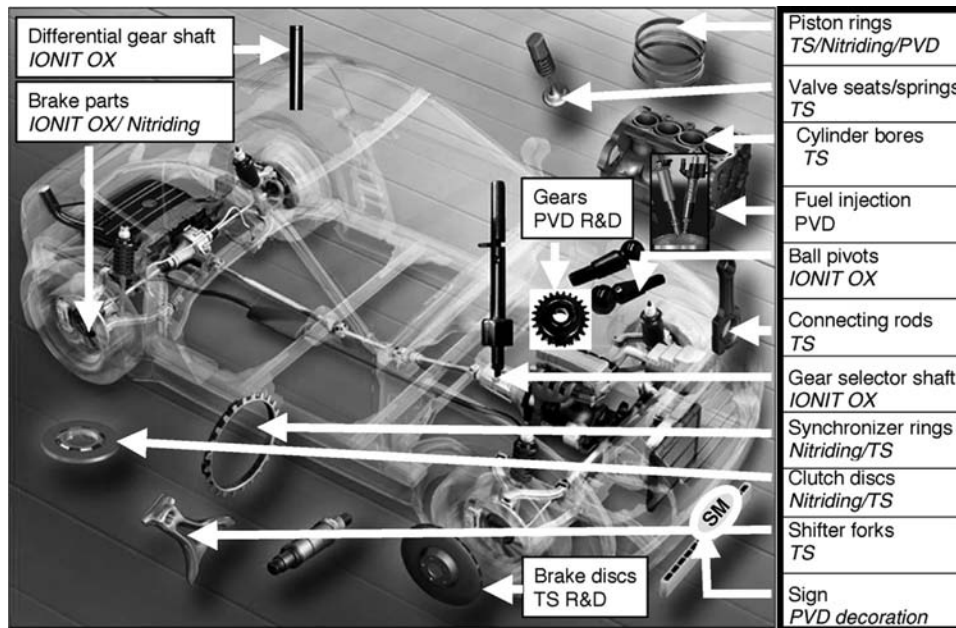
Selected parts that could be treated by surface technologies [60].
